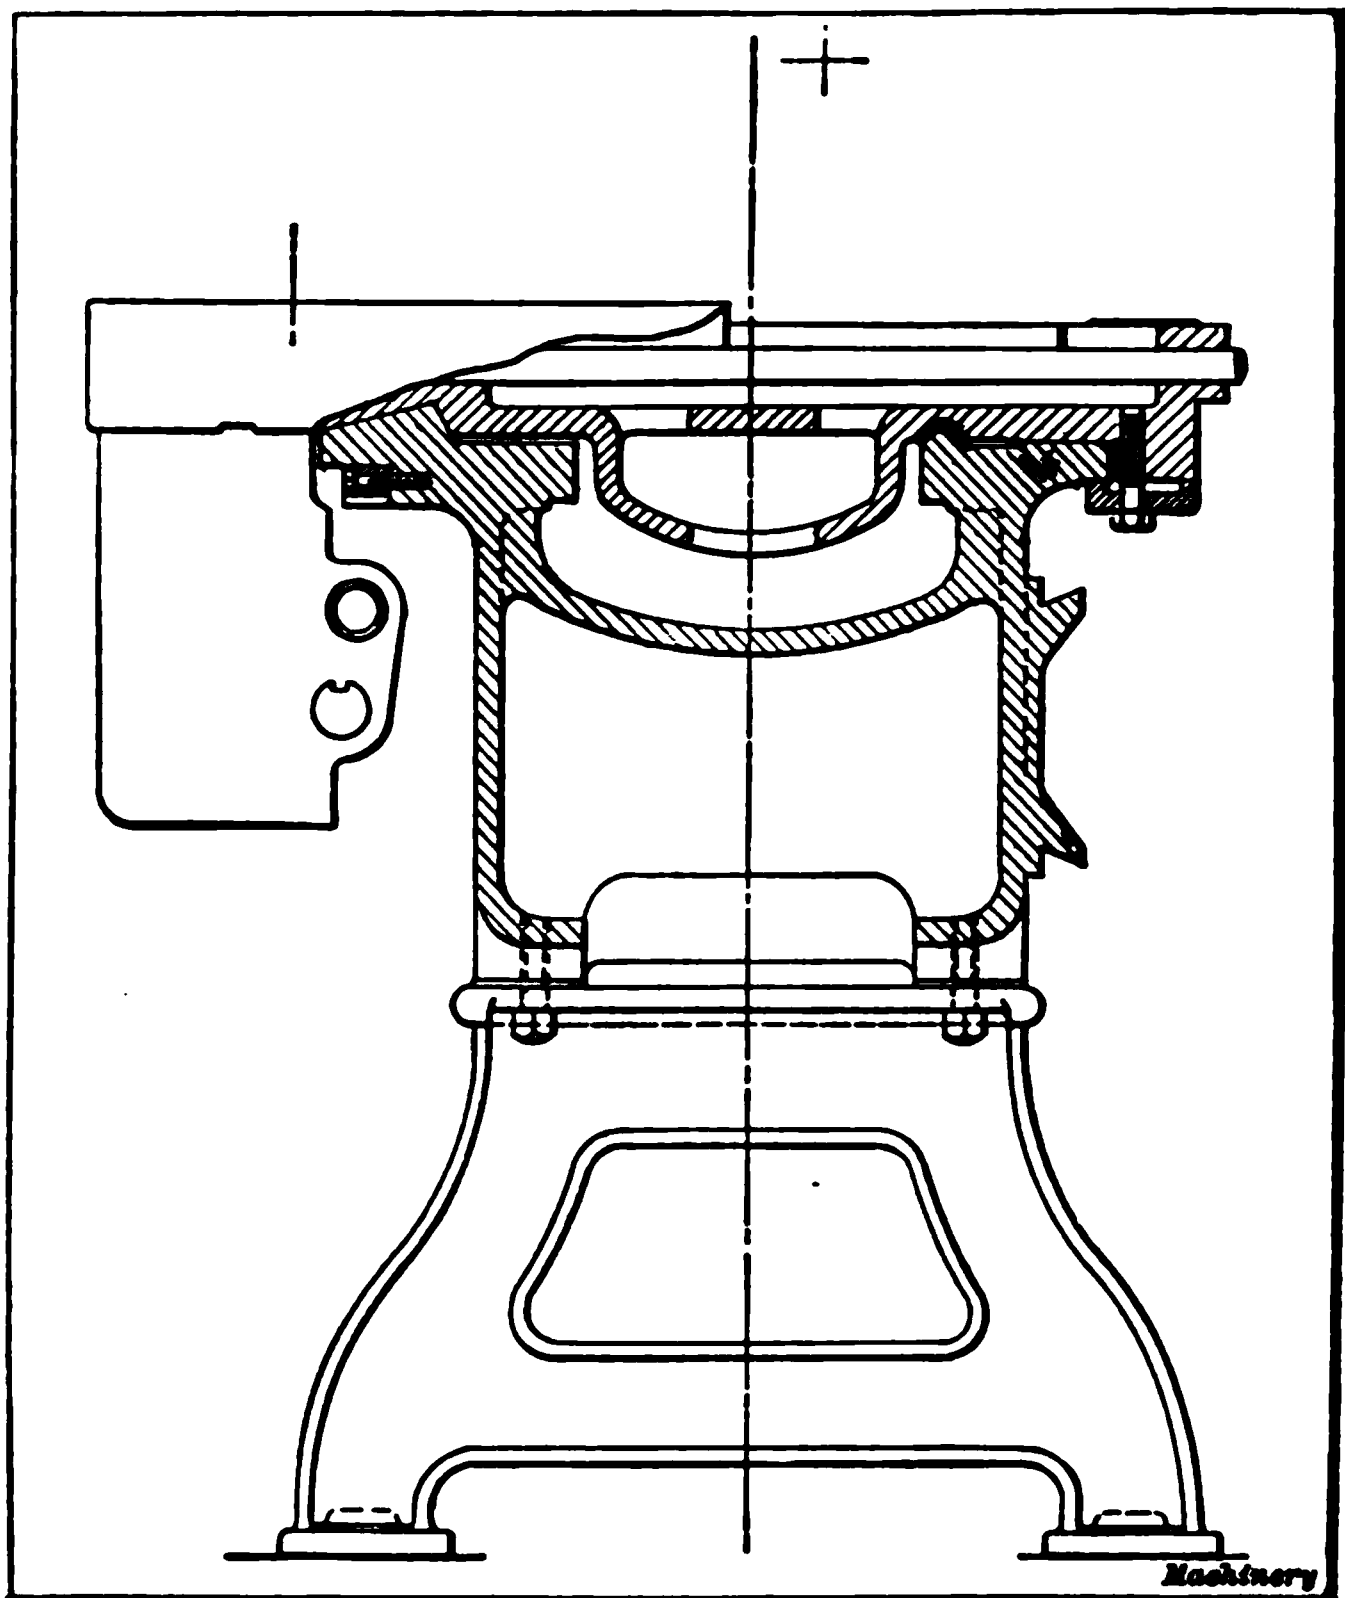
The R. K. LeBlond Machine Tool Co.'s Design of Lathe Bed
